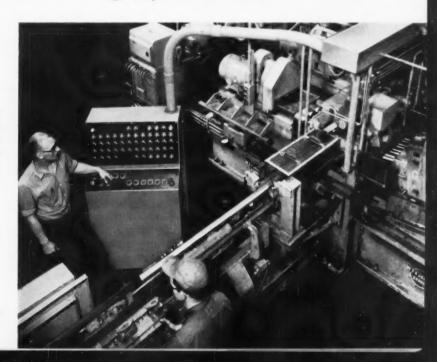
Lengthwise and broadside transfer units and two side loaders are combined in this installation for moving blocks from a washer to either of two finish-boring machines.
